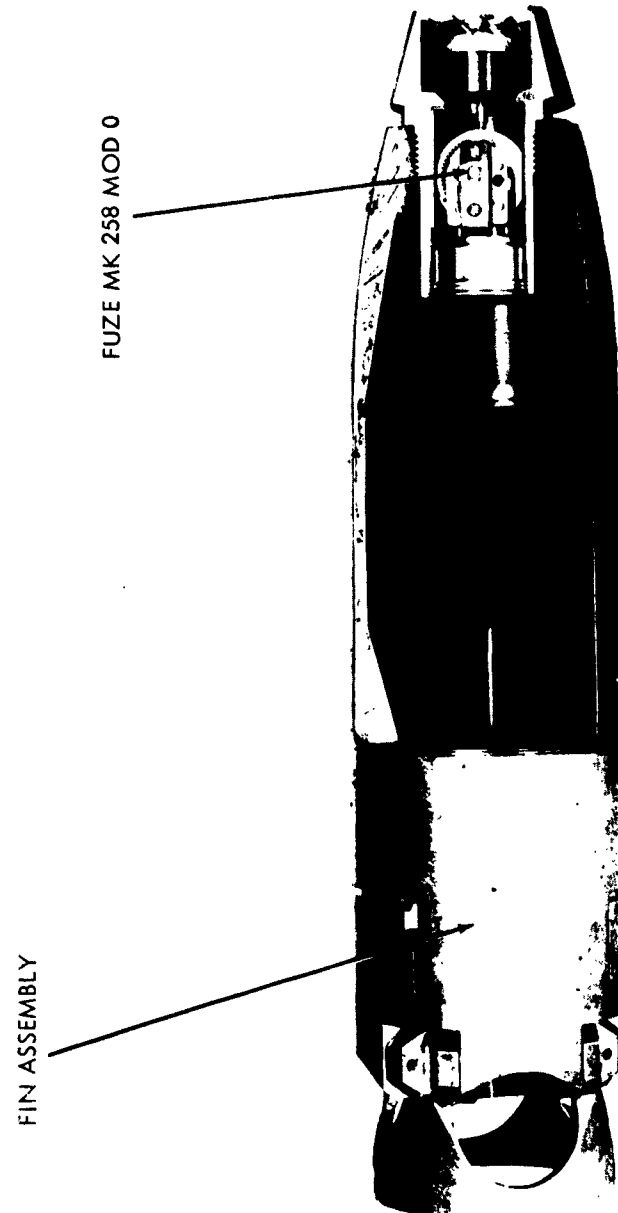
ROCKEYE I BOMBLET, CUTAWAY VIEW
